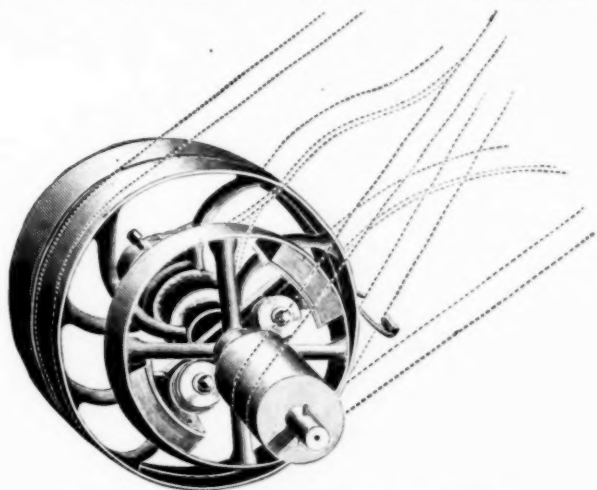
THE ROSS SELF-ADJUSTING FEED DEVICE.
